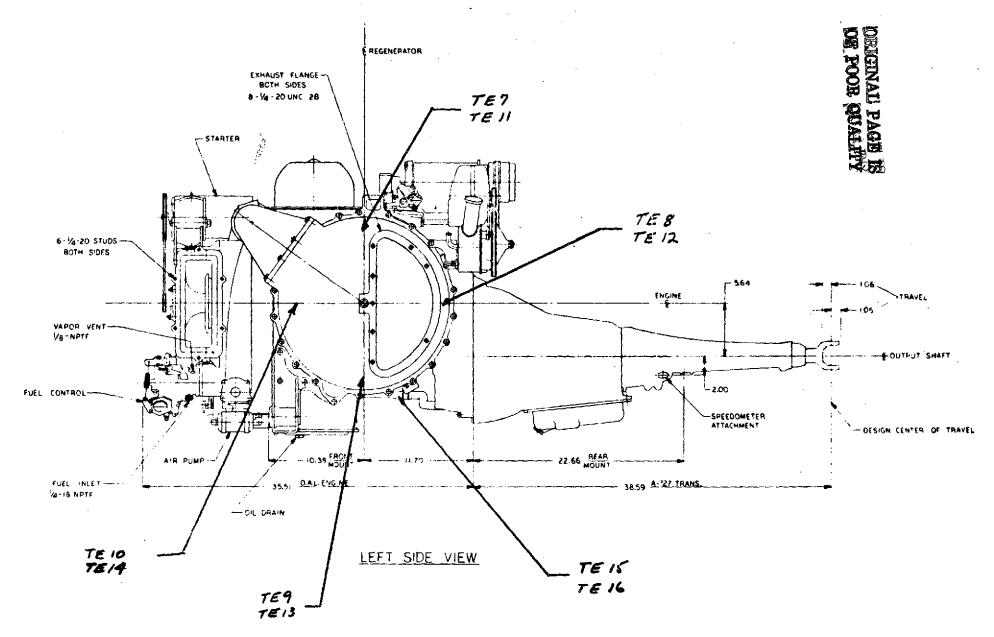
SIDE VIEW OF ENGINE SHOWING THEROCOUPLE LOCATIONS FOR BOTH SIDES.
